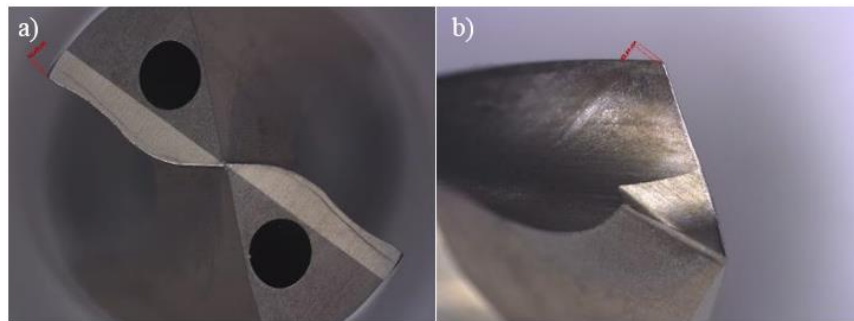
Example of the a) tool(flank)-workpiece contact length, and b) tool-chip contact length.
